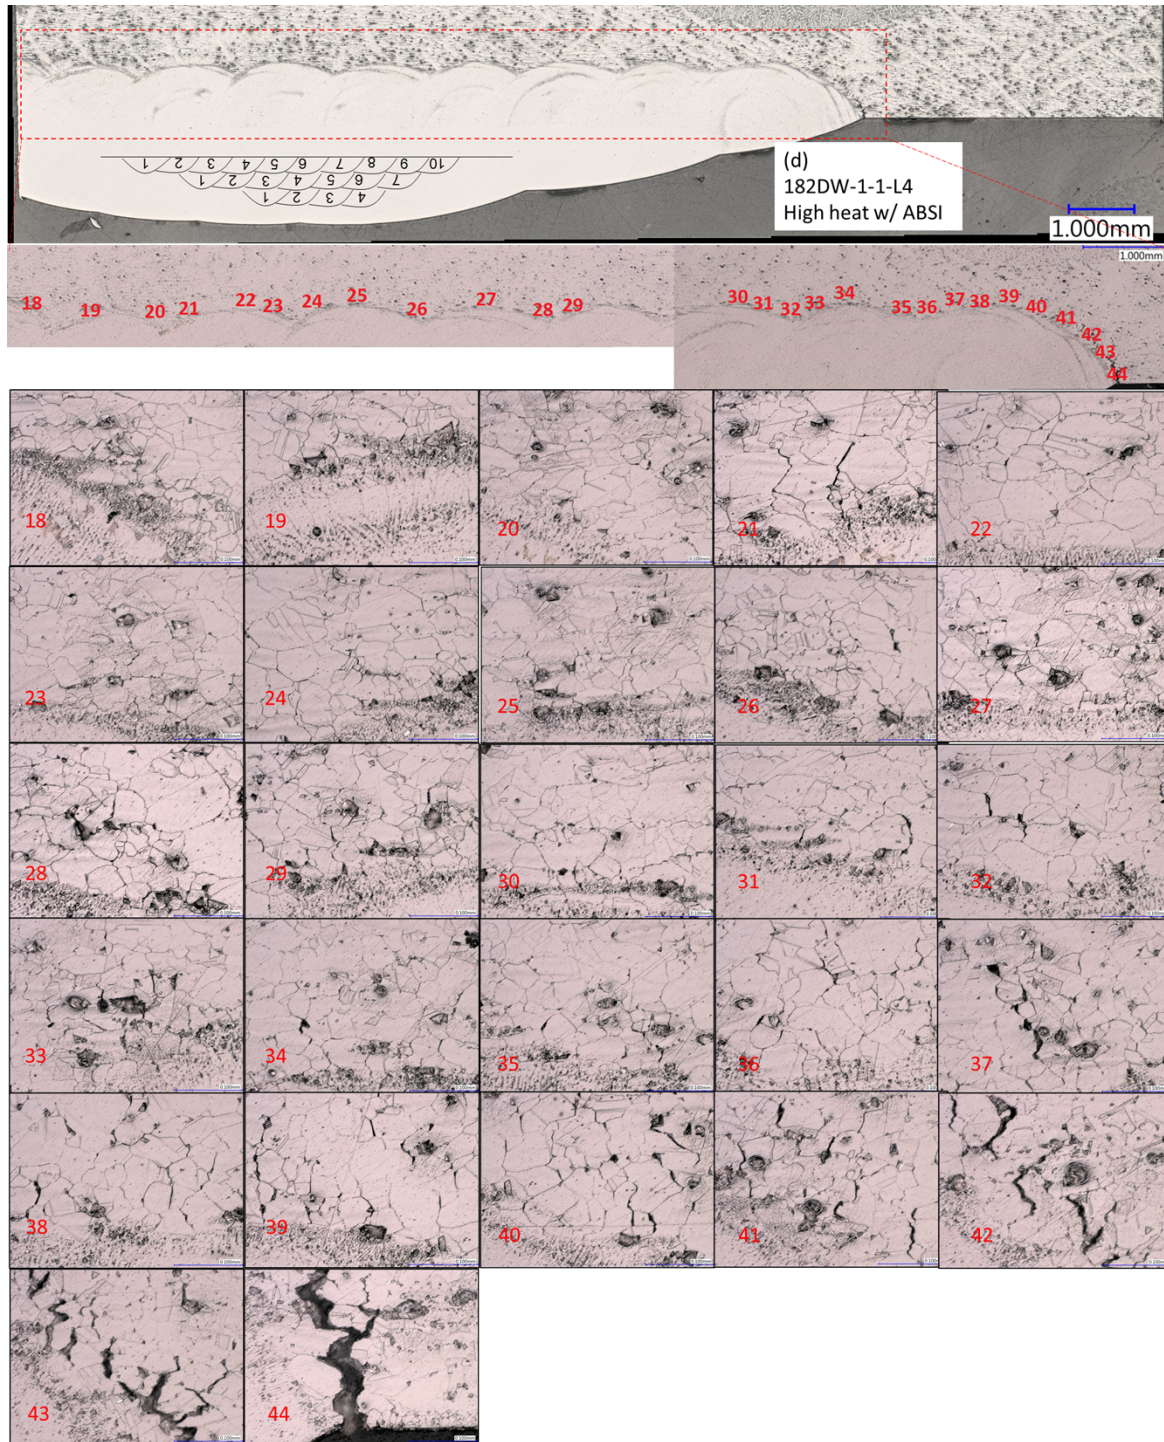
shows the cross-sections of the multi-pass weld clads performed on the coupon with 14 wppm B (182DW-1) investigated in the current weld campaign with four different welding conditions. The two weld clads with high laser heat input were produced on the original base metal side consistent to other weld samples (182B-2 with 5 wppm B and 182C-1 with 15 wppm B). Figure 7c presents the results of high heat input condition without ABSI. Cracks were observed not only on the entry side but also the exit side of the weld toe. Slightly higher tendency of grain boundary degradation was also observed compared with sample 182C-1 with 15 wppm B. With the assistance of ABSI, amount of the grain boundary degradation seems slightly reduced as shown in Figure 7d. However, weld toe crack at the exit side still occurred. A portion of the weld section close to the entry pass side is missing due to bad cutting, but it is reasonable to assume that a weld toe crack also occurred at the entry pass side. Compared with 182C-1 with 15 wppm B (Figure 7c and Figure 7d), 182DW-1 with 14 wppm B (Figure 7c and Figure 7d) seems to have a higher tendency of HeIC formation and grain boundary degradation. This suggests that the fusion welding performed prior to the irradiation might have an influence even on the base metal side.
